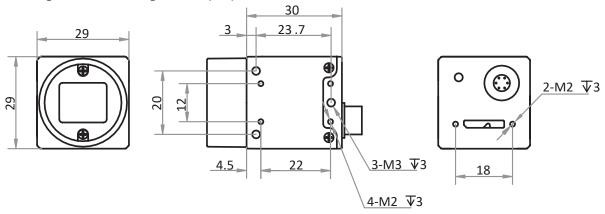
29 mm×29 mm×30 mm Mechanical Dimensions (in mm) of the USB3.0 camera with the USB interface on the bottom.
